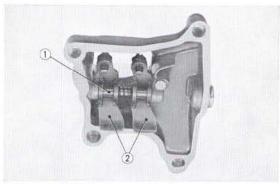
① Valve rocker arm shaft ② Valve rocker arm
